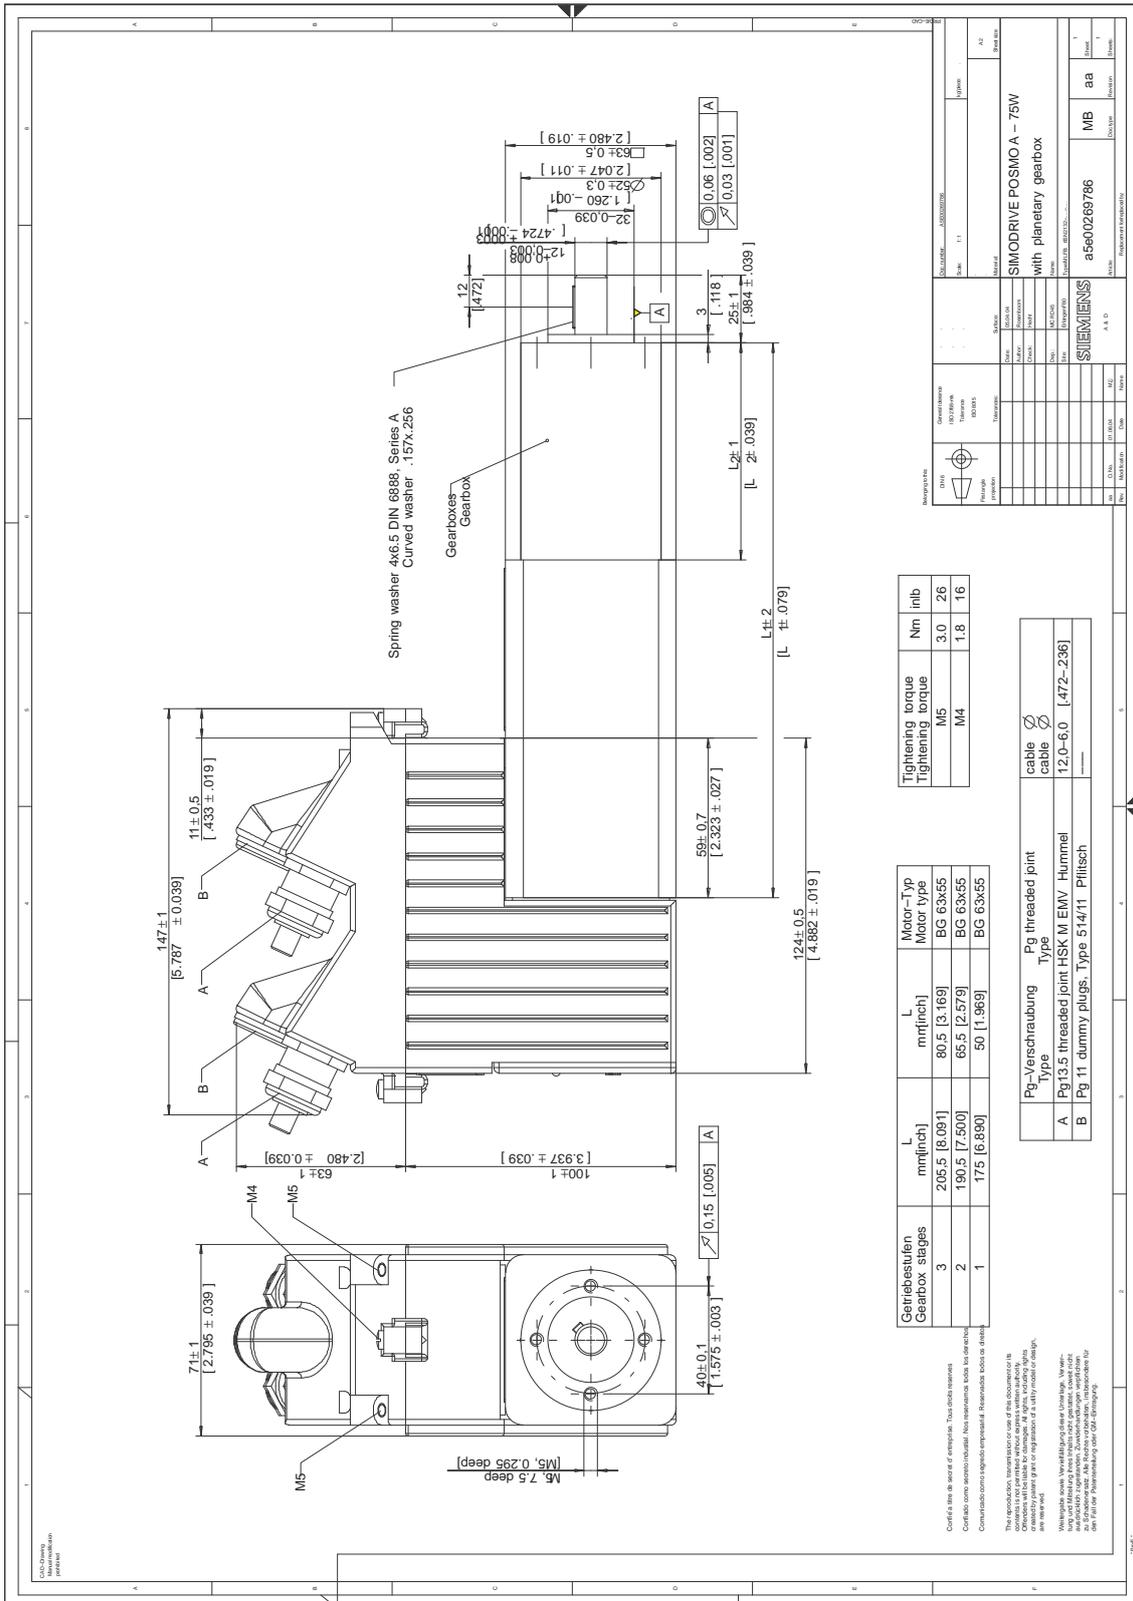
Dimension drawing: SIMODRIVE POSMO A – 75 W with planetary gearbox
